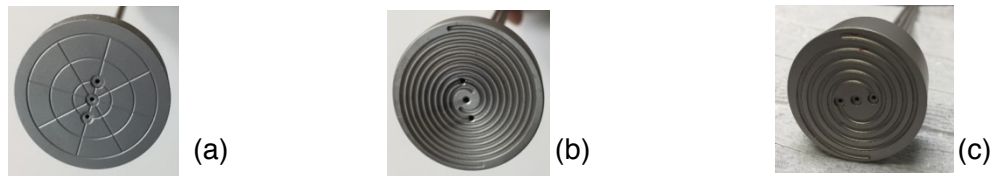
Examples of conventional inlet end-piece designs: (a) Cross, (b) Spiral, and (c) Modified spiral
